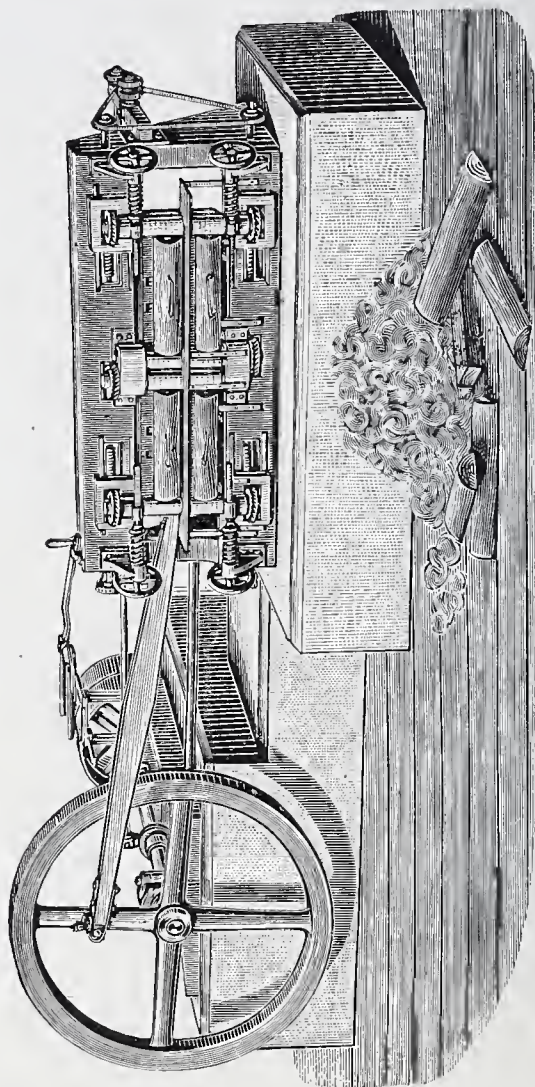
Quadruple Wood-wool Machine without Scribing Knives.
